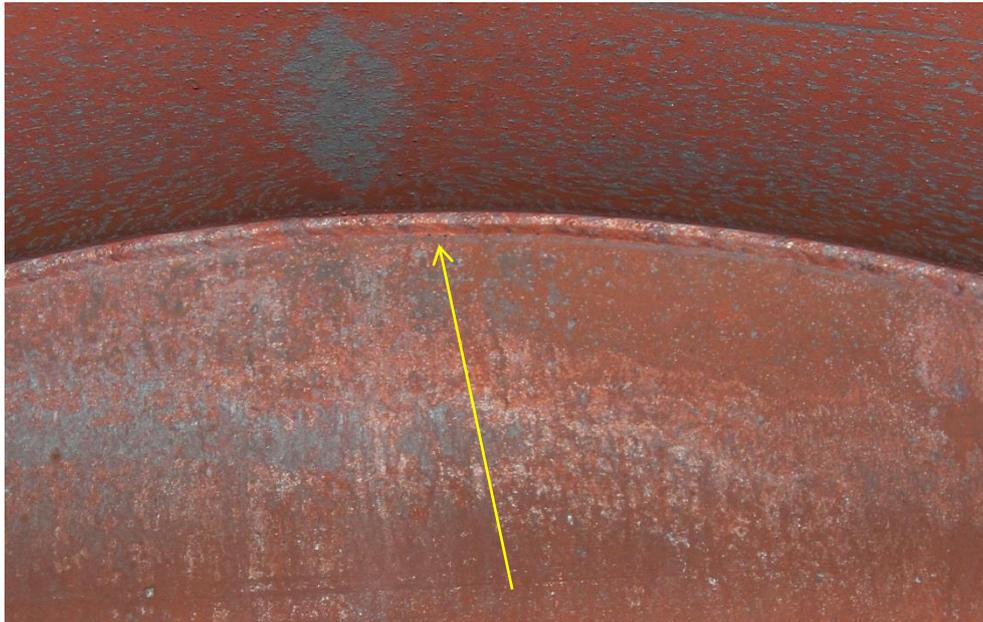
Closer view of front tubeplate to shell showing two off 2 mm diameter holes at the tubeplate toe of the internal fillet weld.
